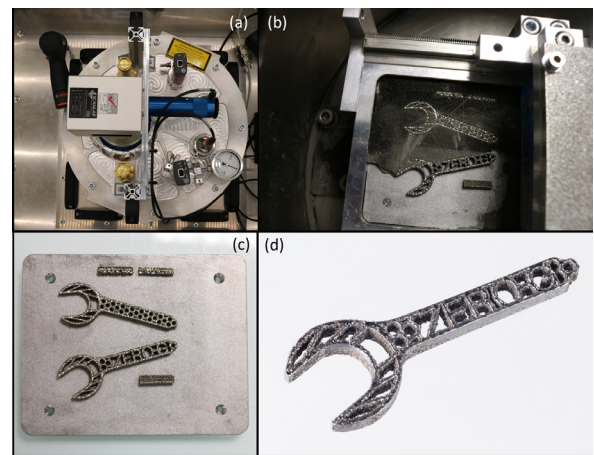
(a) Top view of the deposition chamber, showing the laser scanner and optics, two oxygen sensors, two pressure gauges, and two overpressure safety valves; (b) View of the deposition unit during cleaning after a parabolic flight, showing the wrenches produced by LBM still partially embedded in the powder bed; (c) Top view of the porous metal base plate on which the wrenches were manufactured in microgravity; (d) 12 mm wrench manufactured in microgravity, after separation from the base plate (the base plate has a size of 106.5 mm × 85.5 mm).
